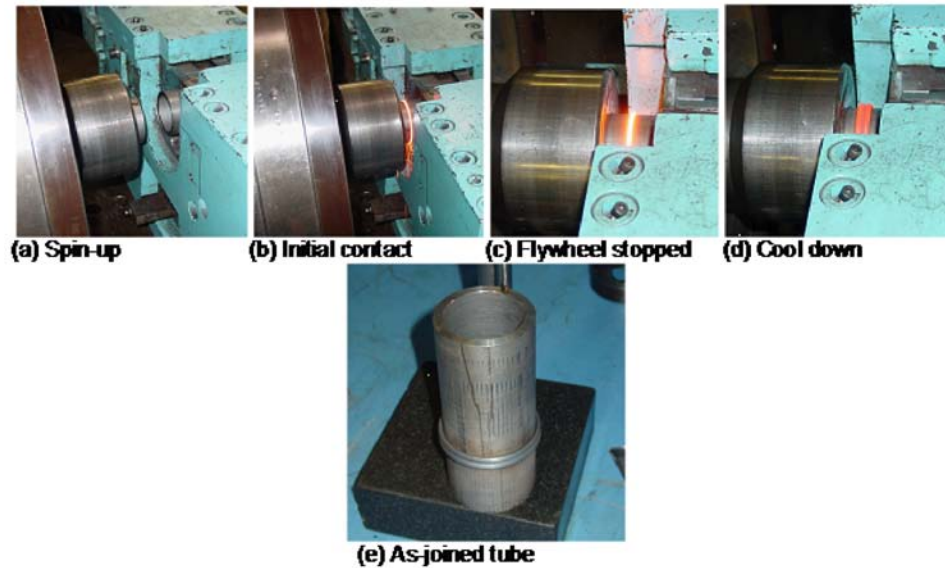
Sequences in the inertia welding of a MA956 Tube (after B. K. Kad et al.³).
